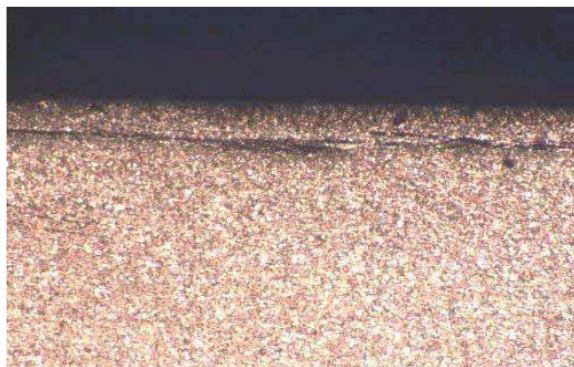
Faying surface flaw in a Cu-DHP weld
